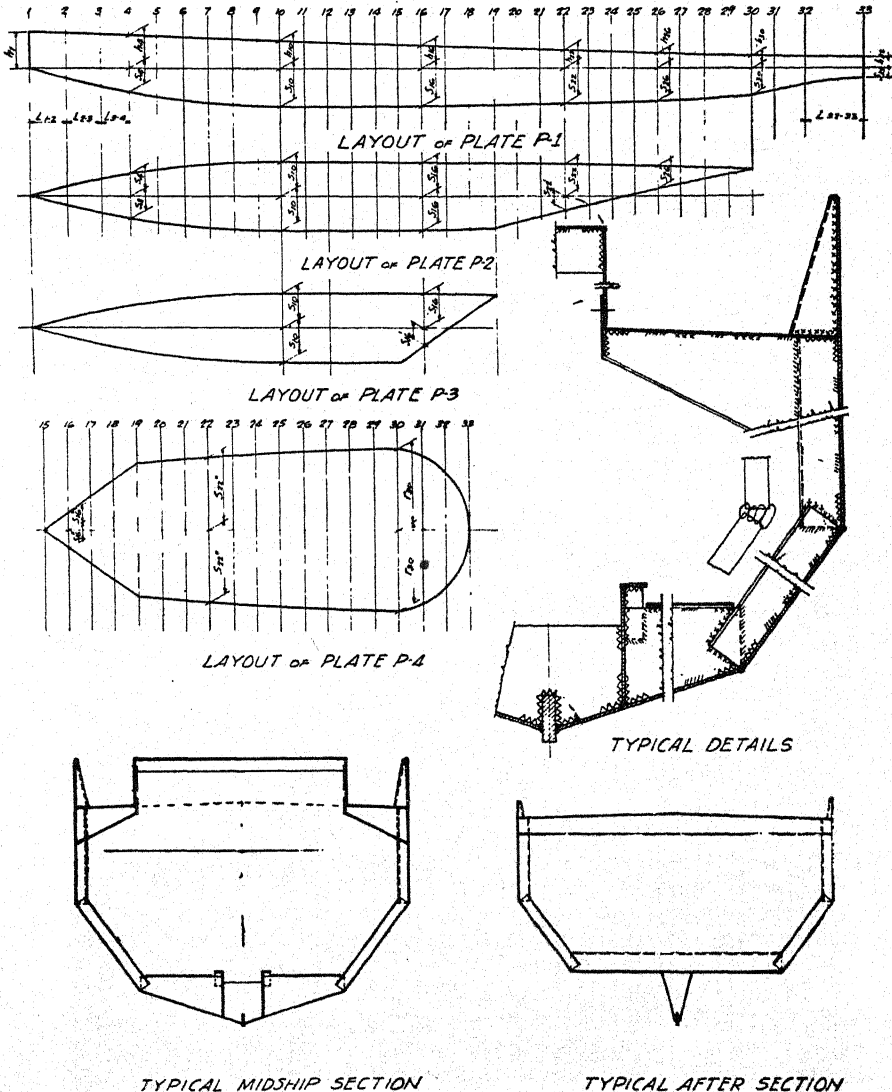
Layouts of plates and details of typical sections of arc welded towboat.
